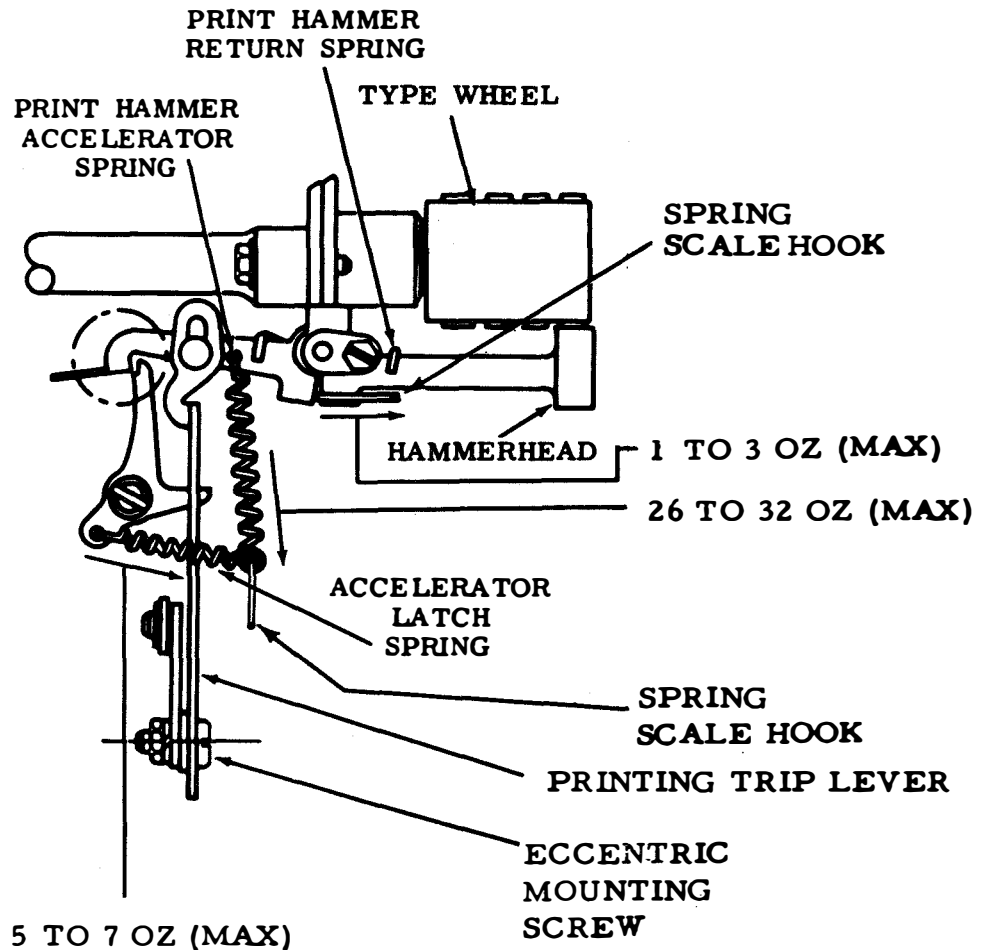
Print Hammer Return Spring, Accelerator Spring, and Accelerator Latch Spring - Left Side View
